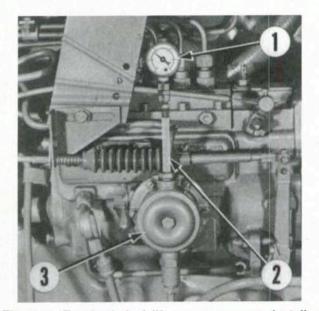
To check fuel lift pump pressure, install a pressure gage (1) in outlet port of lift pump (3) and operate priming lever.
